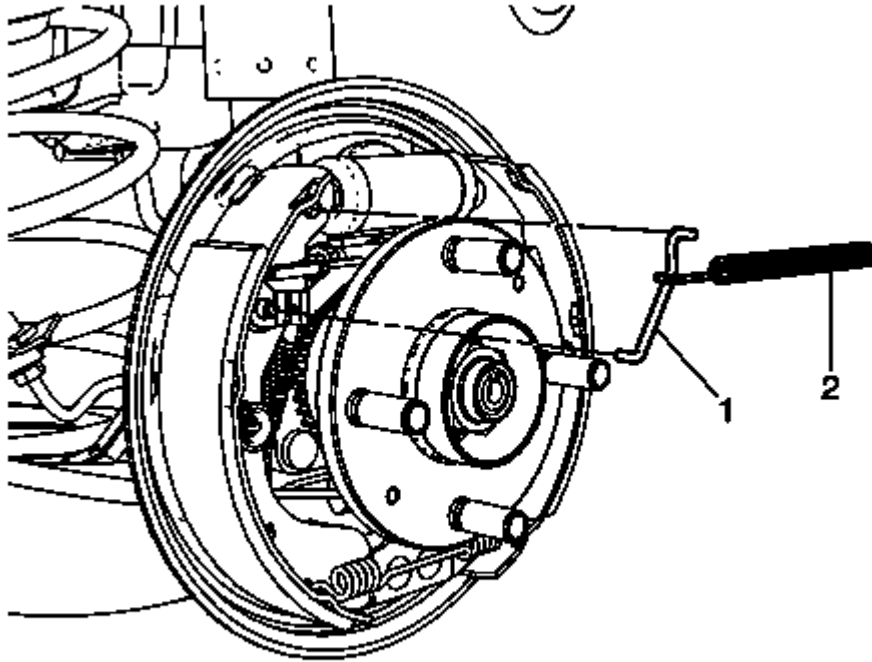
Spring Fastener And Upper Brake Shoe Return Spring
